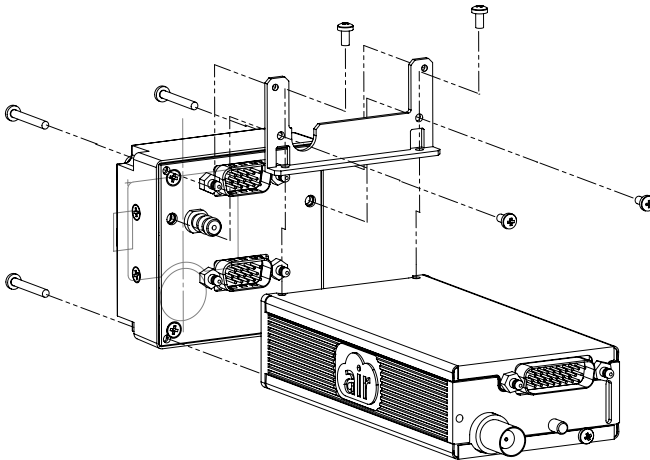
Exploded drawing of ACD-57, AC-1, and all small parts of the optional mounting kit.
